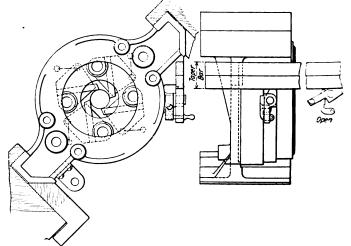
View of Cutter Head Showing Relation of Cutter Blades to Bolts to Be Turned
